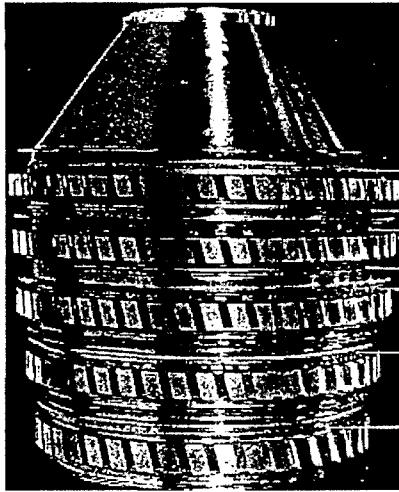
Appearance of electron beam welded compressor rotor
